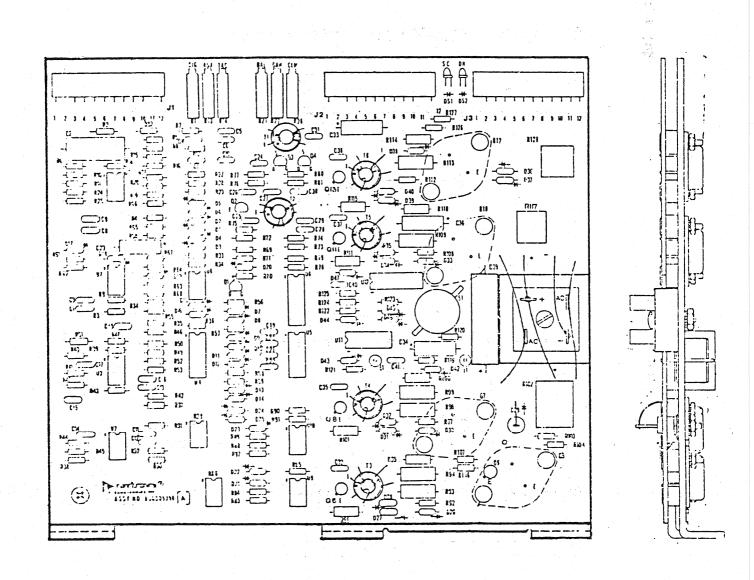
AXIS DRIVE COMPONENT LOCATION
